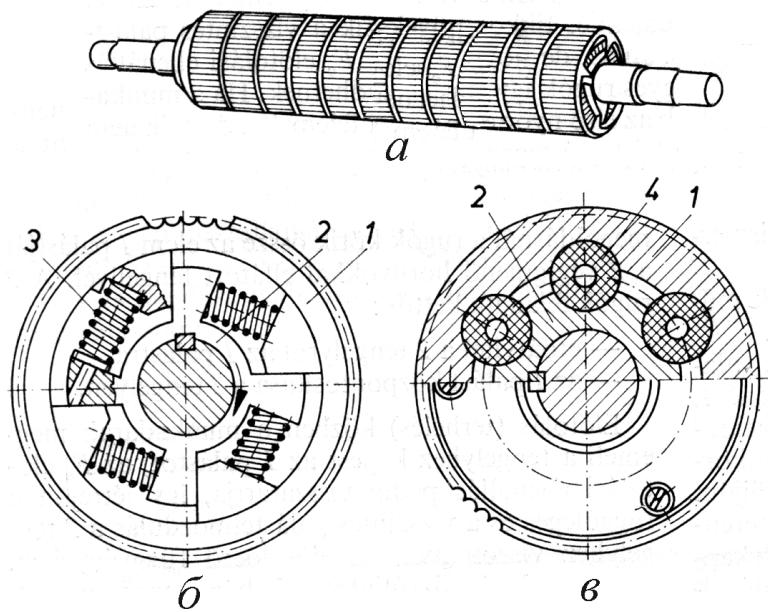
Sectional feeding roller: a – general view; b – cross-section of the spring sectional roller; c – the same with rubber rings; 1 – outer grooved ring; 2 – drive shaft; 3 – springs; 4 – rubber bushings.
